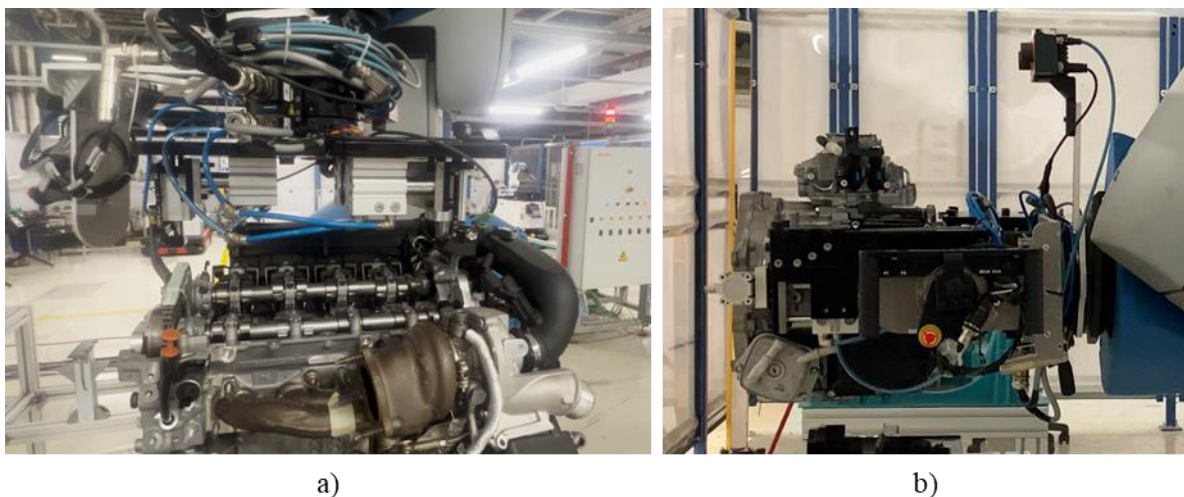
Integration of a) motor and b) gearbox grippers in the industrial demonstrator of STELLANTIS
